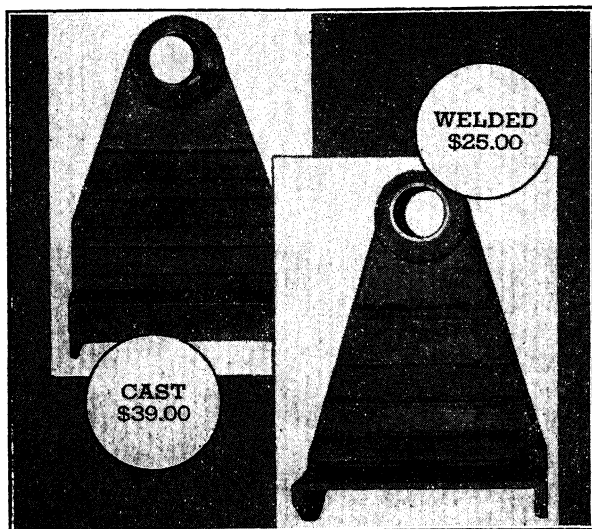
A dipper stick yoke for a crawler shovel, changed from a cast steel construction costing \$39 to welded steel costing only \$25.
